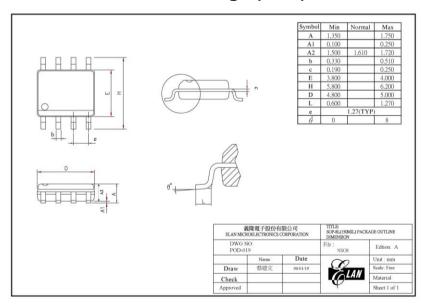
EM78P151 8-Pin SOP (150 mil) Package Type
